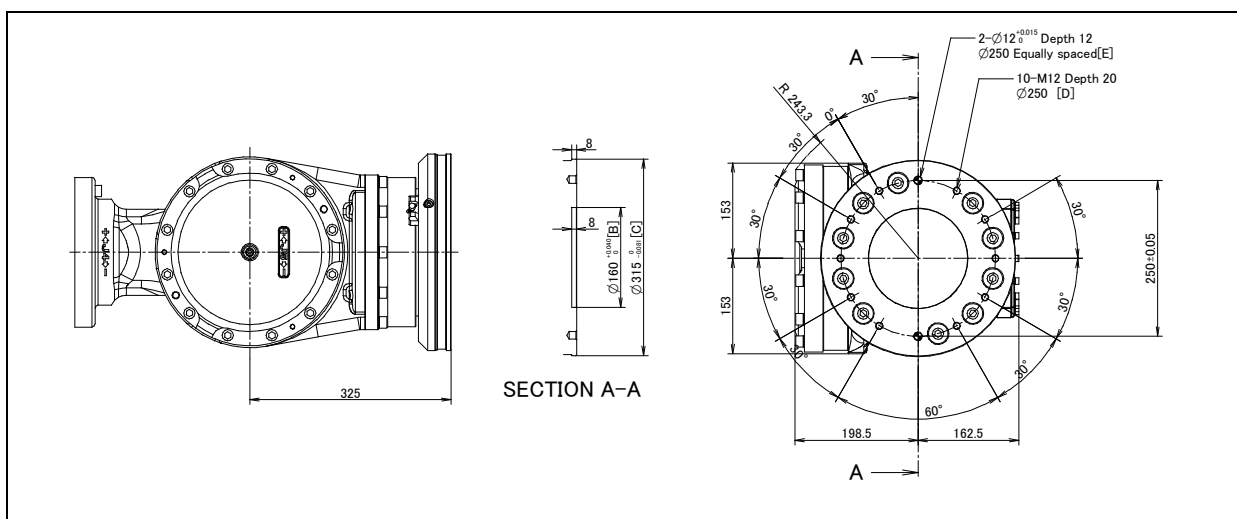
(b) End effector mounting face (Insulated flange)
